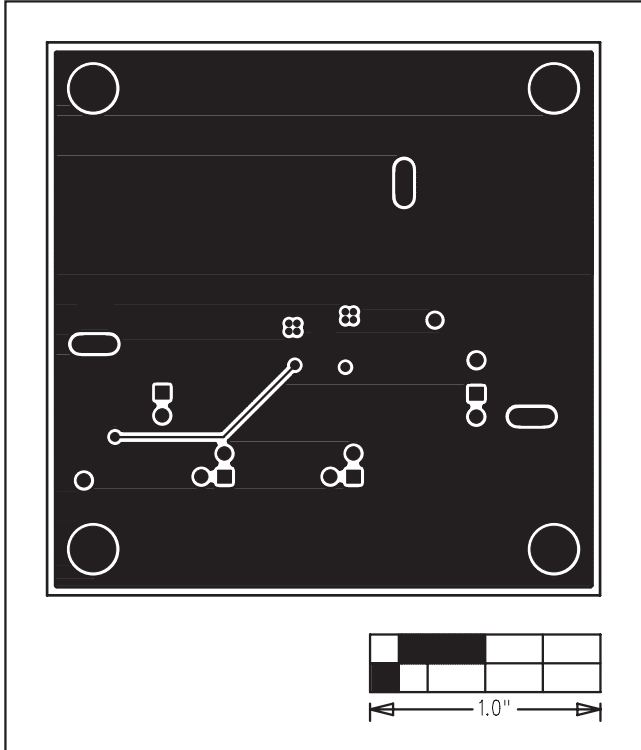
MAX17083 EV Kit PCB Layout—PGND Layer 2
